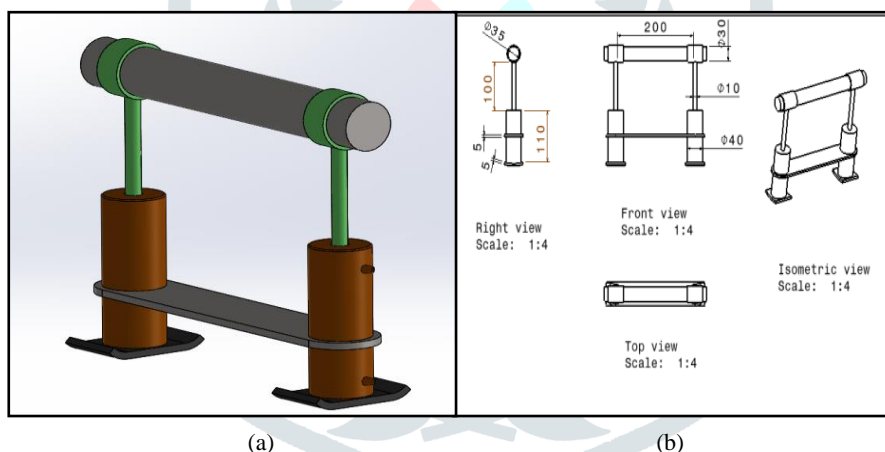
(a) CAD Model (b) Drafting of CAD Model
